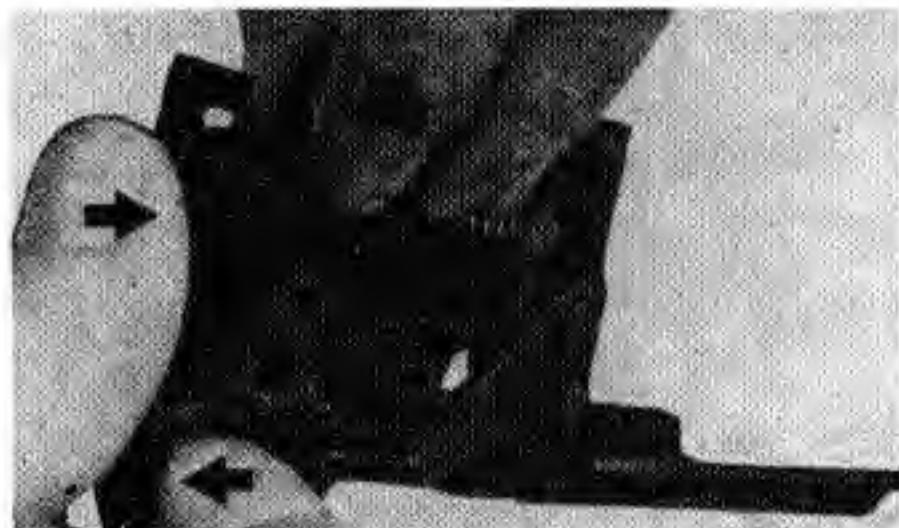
Replacing the trigger assembly, hammer spring housing, hammer spring and plunger.
